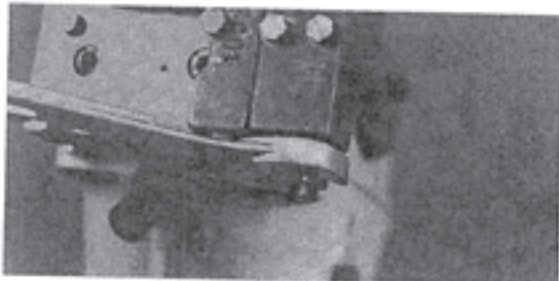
Loosen PCOR/PC Lock Nut
